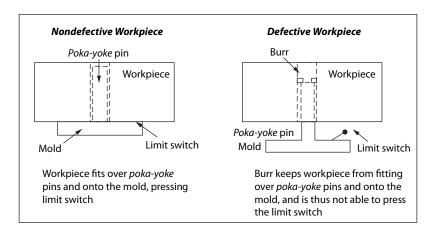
Defect-Preventing Device that Prevents Injection Mold Burr Defects from Being Passed Downstream.
